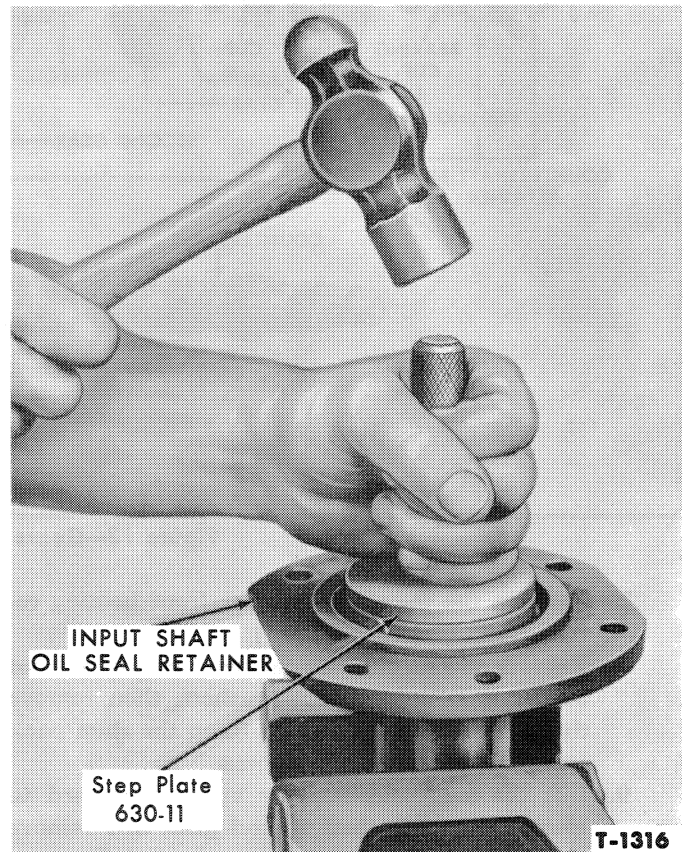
Installing Oil Seal in Input Shaft Oil Seal Retainer
